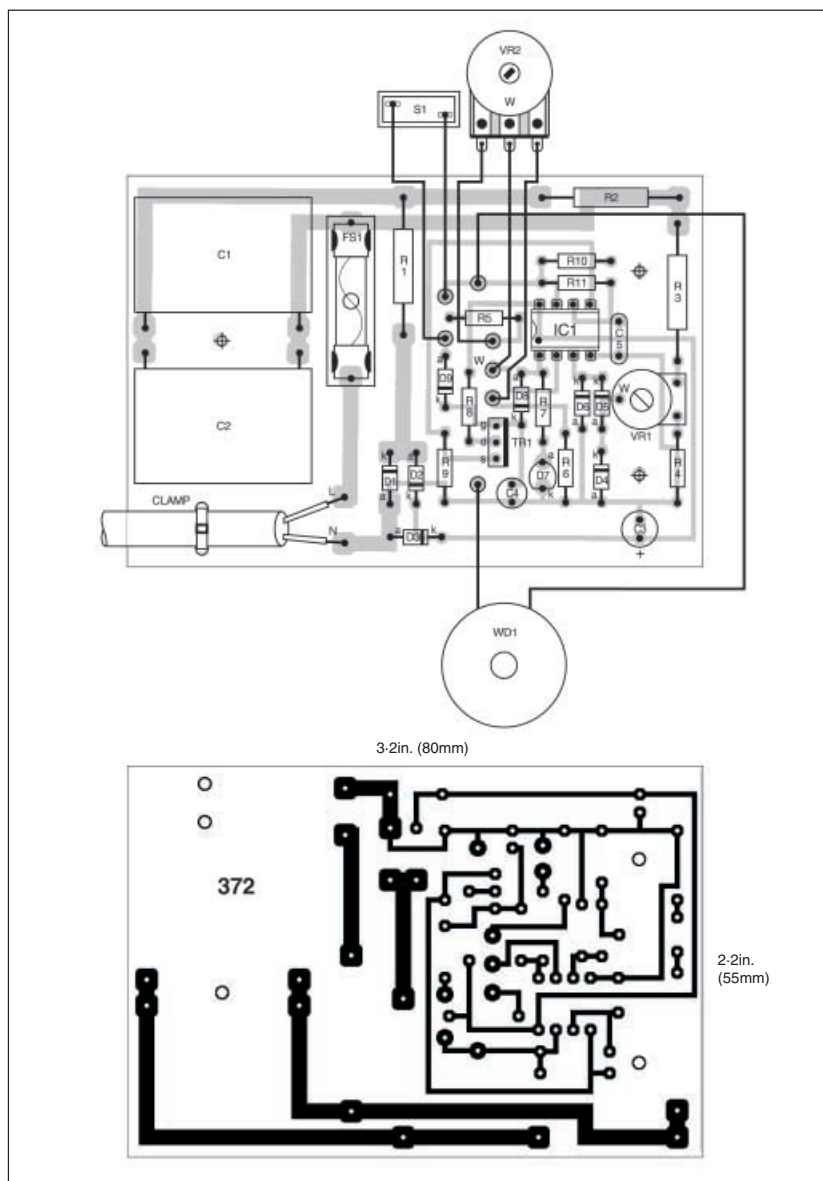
Printed circuit board topside component layout, wiring and full-size copper foil master for the Transient Tracker.
